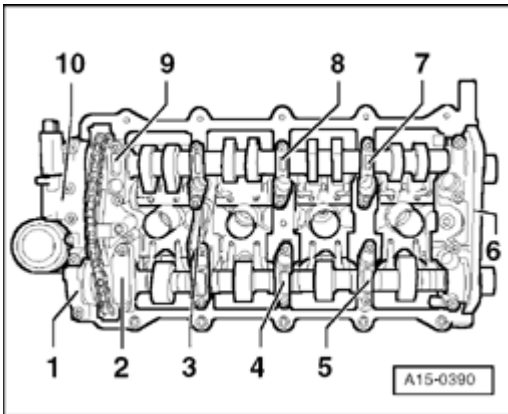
Installing Camshafts Without Chain Into Cylinder Head And Tightening With Bearing Caps
